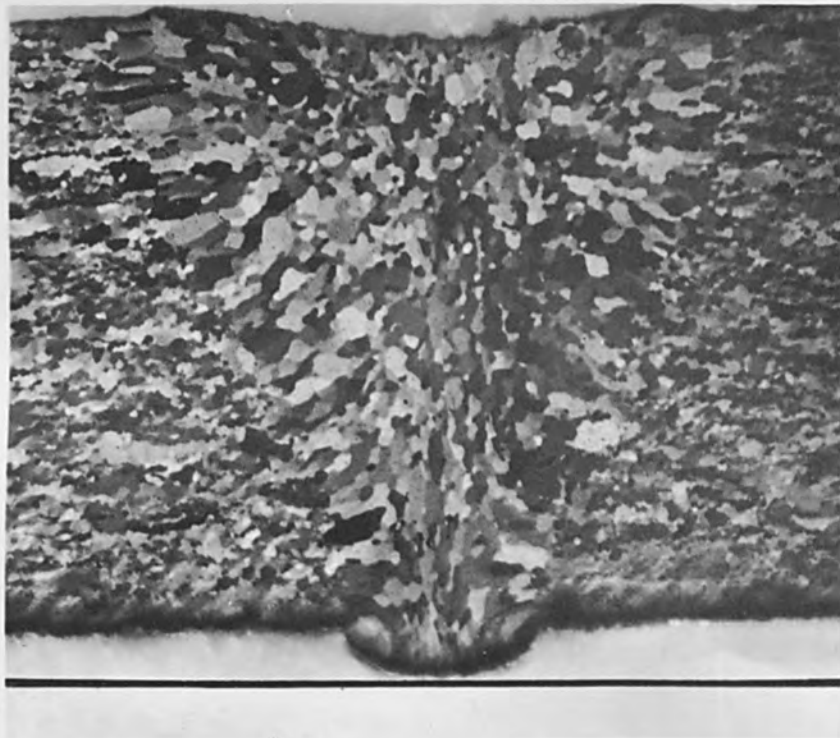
Weld Cross-section in 0.040-in. Beryllium
